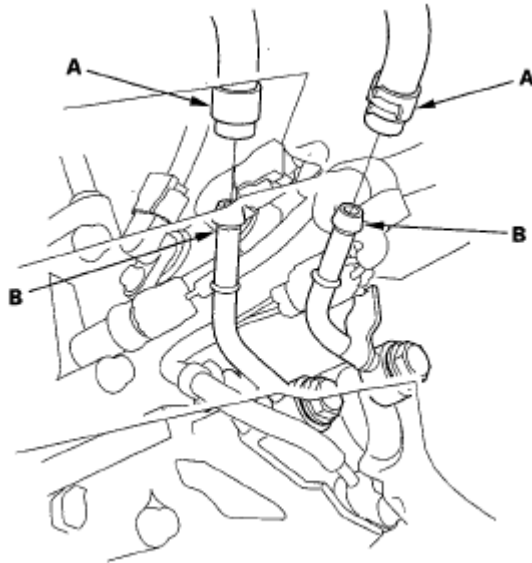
Identifying ATF Cooler Hoses And ATF Cooler Lines
